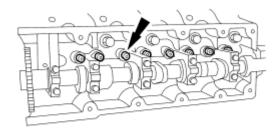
Compressing Valve Spring Courtesy of FORD MOTOR CO.
